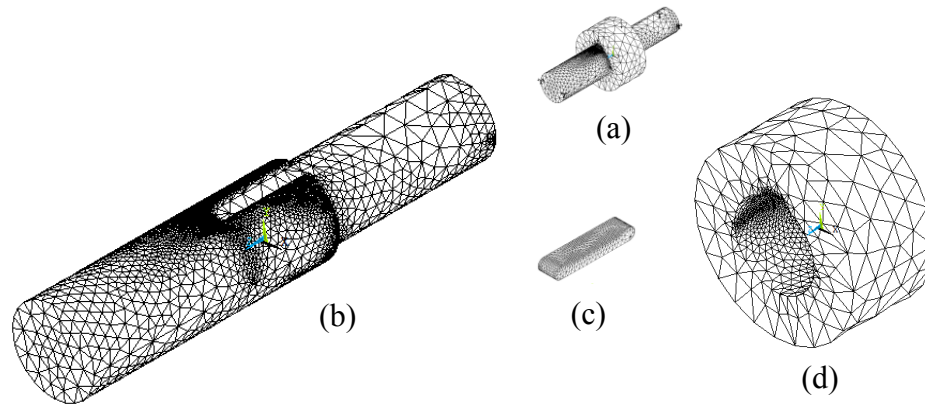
FEM model of bending model of hub, key and a stepped shaft with sled runner keyway, (a) Assembled parts, (b) Shaft, (c) Key, (d) Hub
